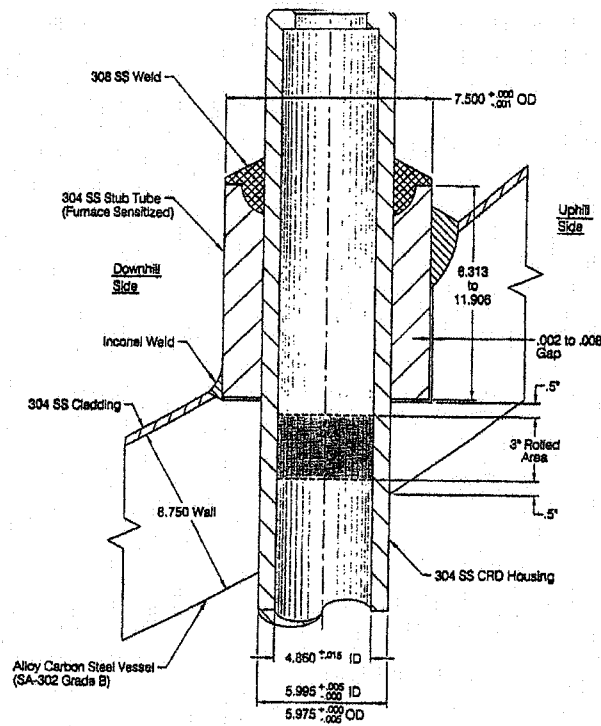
Stub Tube and CRD Housing Assembly with Roll Repair (not drawn to scale) [5]
